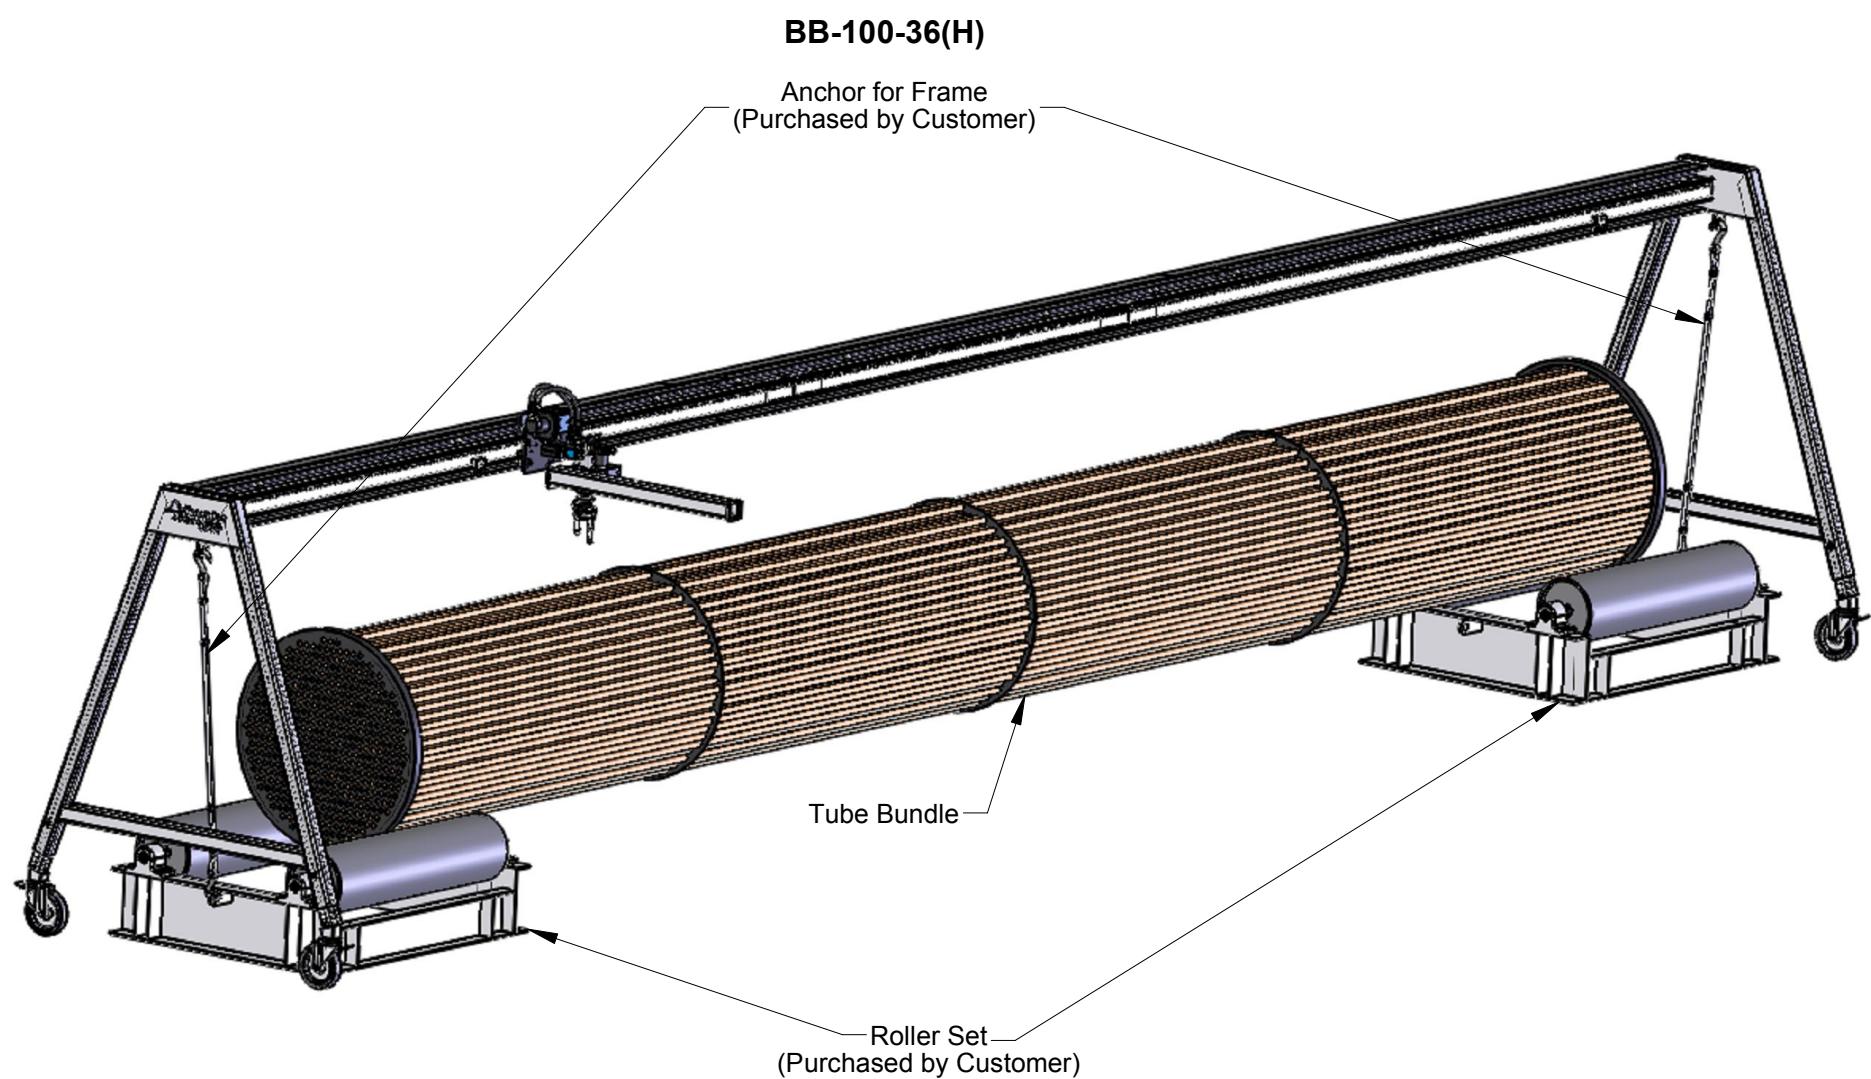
BB-100-36(H) Bundle Blaster Frame shown with a 40 inch X 30 ft tube bundle. For longer tube bundles (up to 34 ft) anchor the frame assembly directly to the rollers as shown. Optional Rollers are available through StoneAge Tools. Consult your StoneAge Account Representative for more information.
